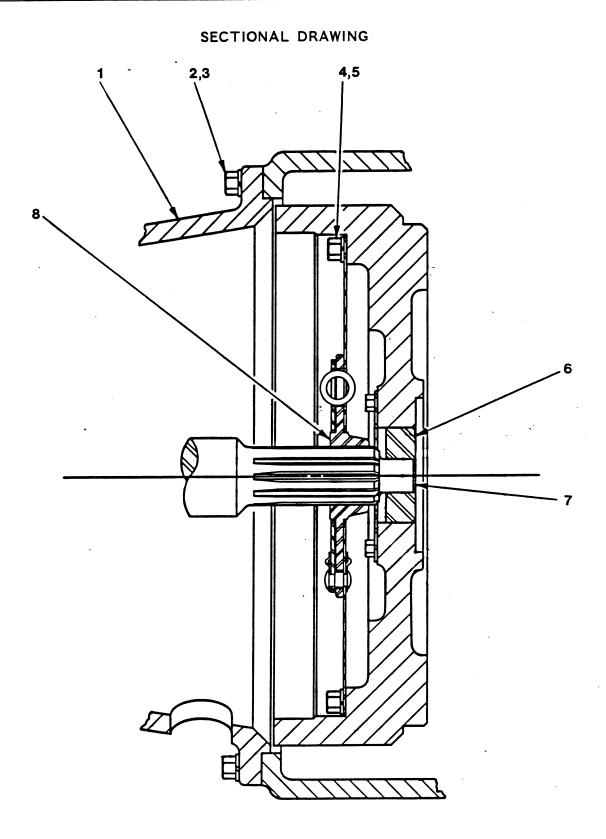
Drive Assembly For Model 55M2-5044-HT/S1
